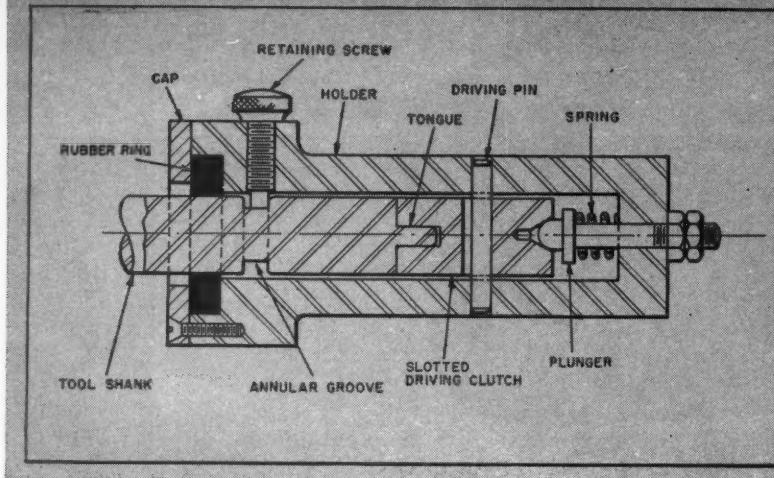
A slotted driving clutch enables tools to be quickly changed in this holder. The shank and clutch are held in mesh by a retaining screw
